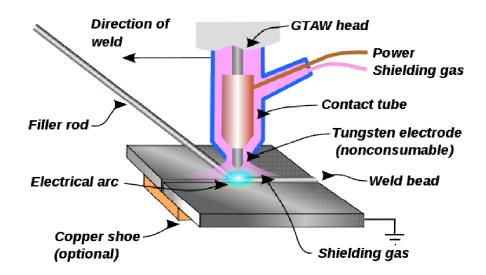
Gas tungsten arc welding (GTAW)
